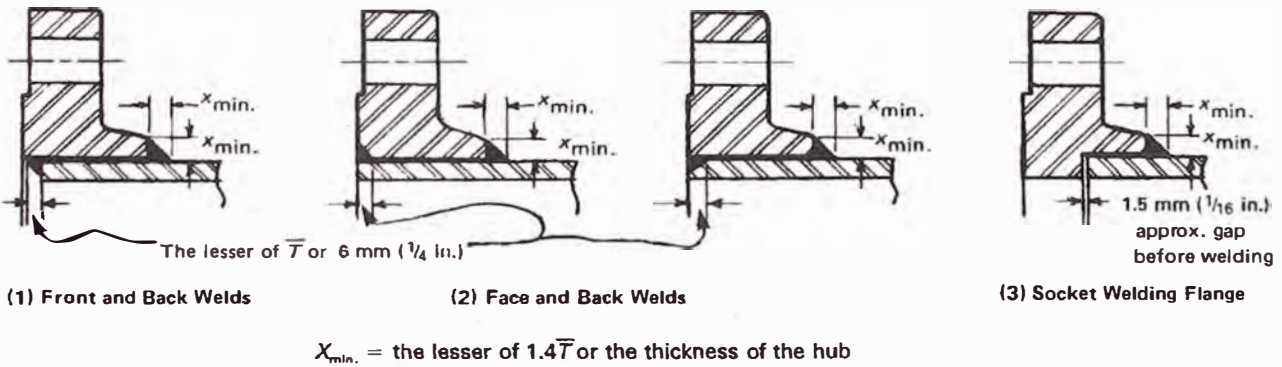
B Typical Details for Double-Welded Slip-On and Socket Welding Flange Attachment Welds
